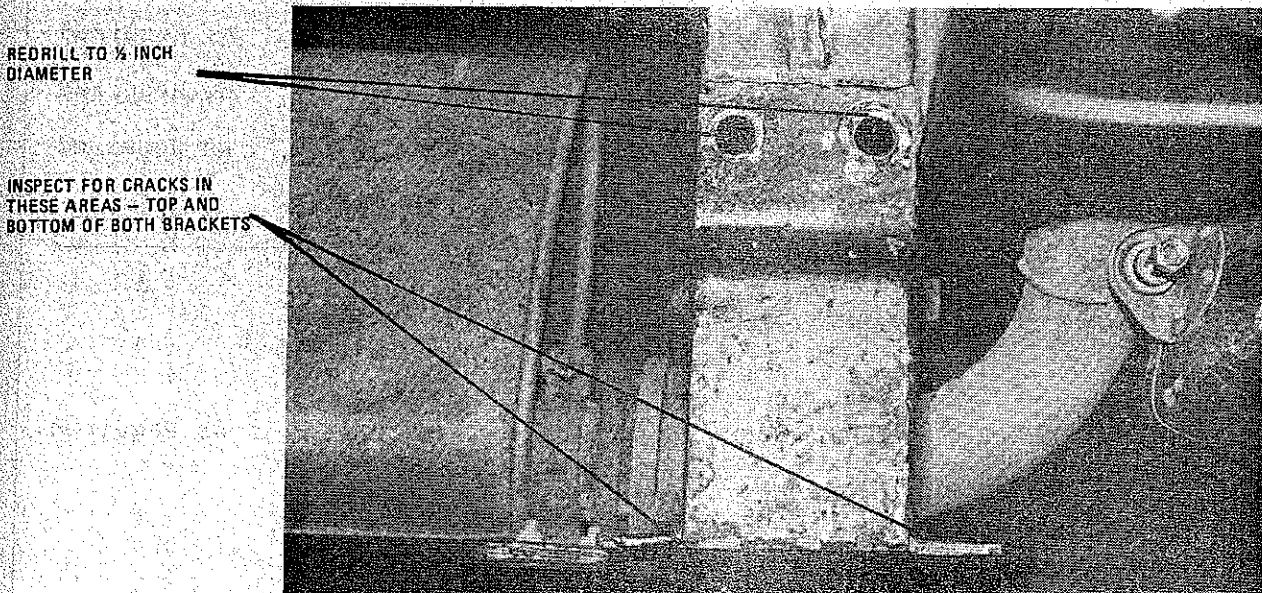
LH BUMPER BAR MOUNTING BRACKET
